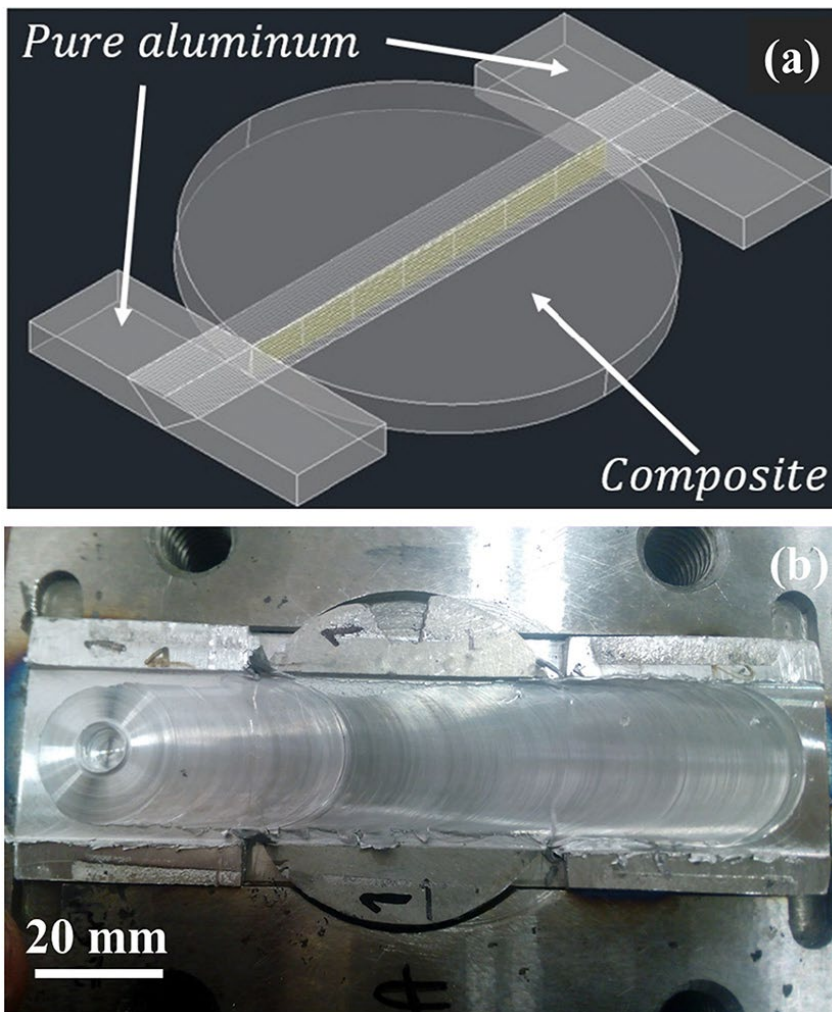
FSW schematic and specimen preparation a); aspect of the weld after FSW b).
